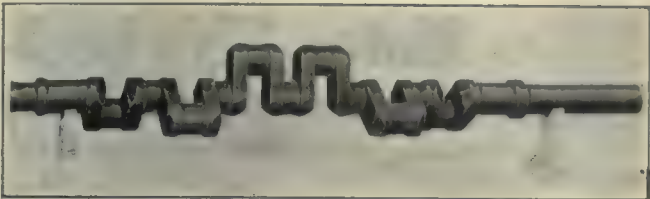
A LIBERTY ENGINE CRANKSHAFT FORGING OF MEDIUM NICKEL-CHROMIUM STEEL
